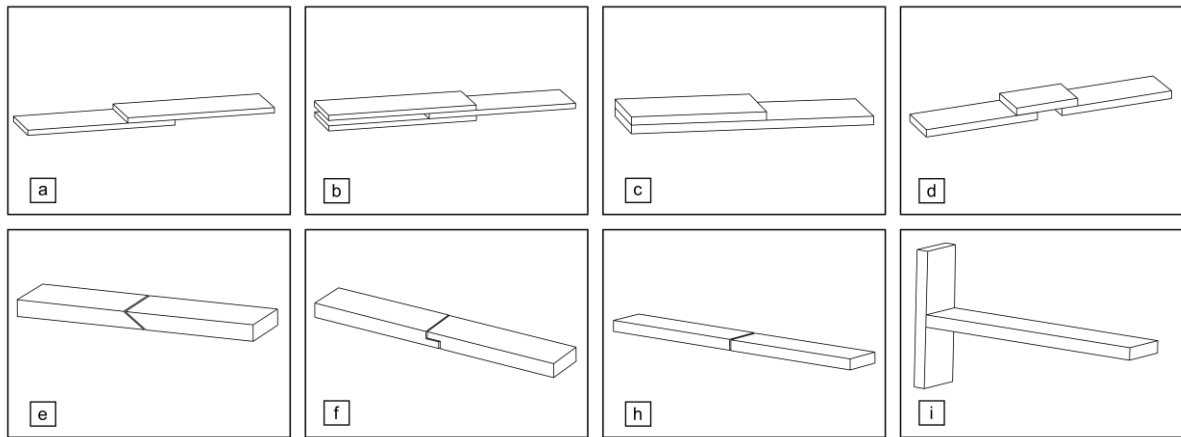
Typical joint configurations: (a) single-lap, (b) double-lap, (c) lap-strap, (d) single-strap, (e) scarf, (f) stepped, (g) butt, and (i) tee joints, adapted from [2.1].
